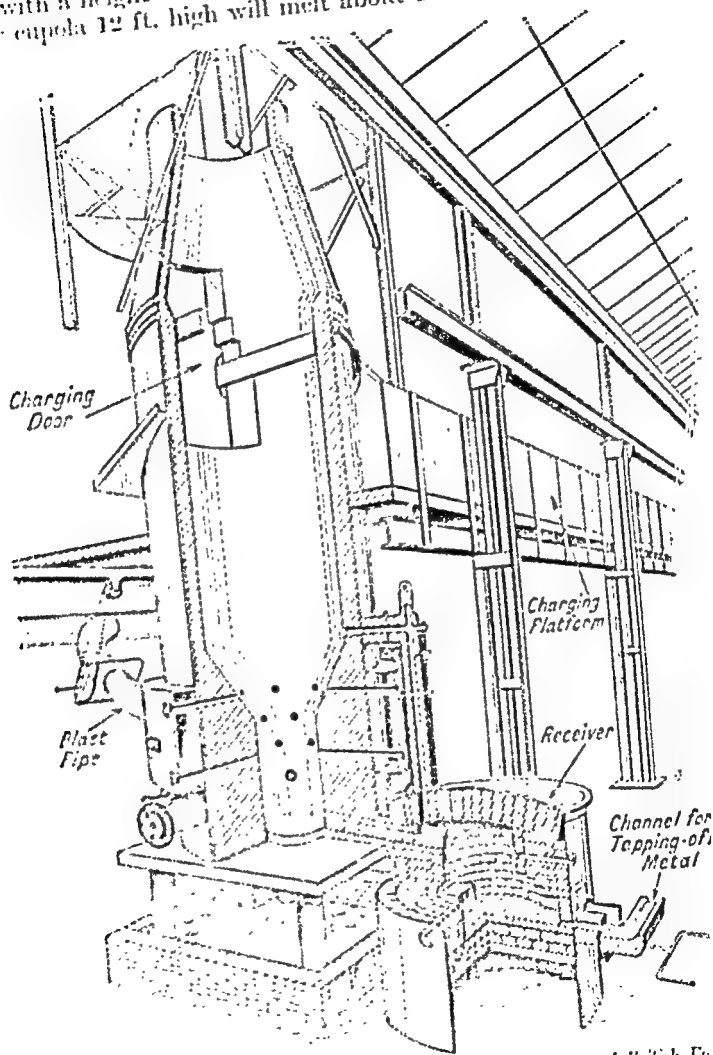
Sectional View of Cupola and Hot Metal Receiver.
